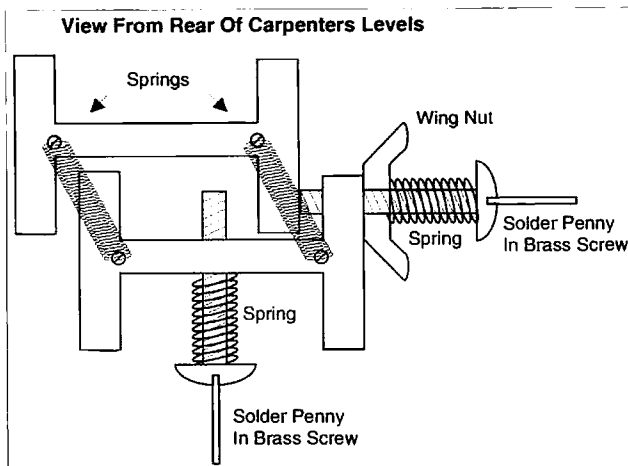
End section drawing of a laser two-screw positioning mount using two metal carpenter levels.
